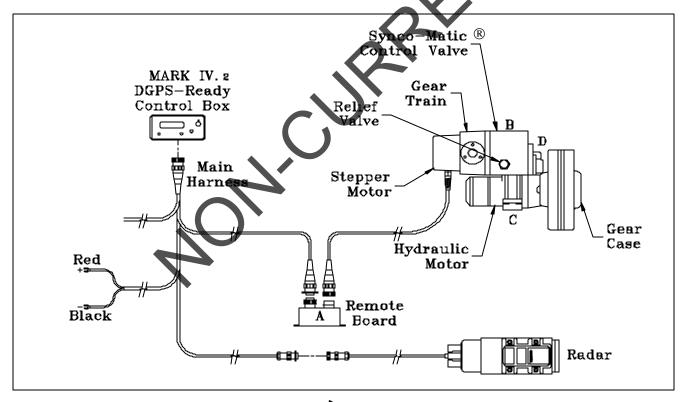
Synco-Matic Ò Mark IV.2 Assembly
